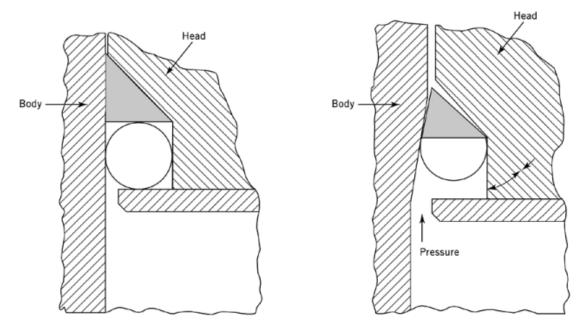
O-ring backed up by miter ring to seal vessel (121).
